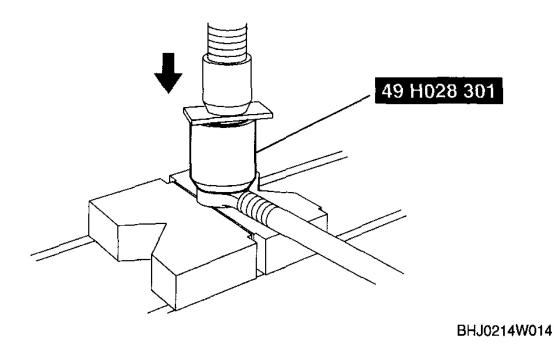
Installing Dust Boot To Ball Joint Using SST Courtesy of MAZDA MOTORS CORP.
